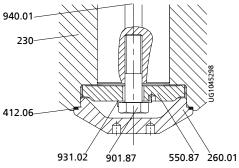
Impeller fastening elements M85x2, M125x2 and M100x2
